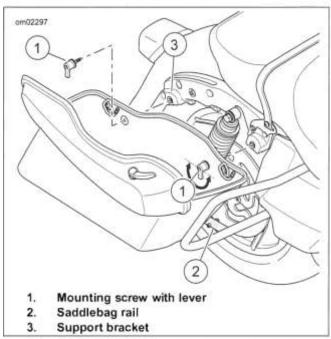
Saddlebag Removal/Installation DISASSEMBLE
